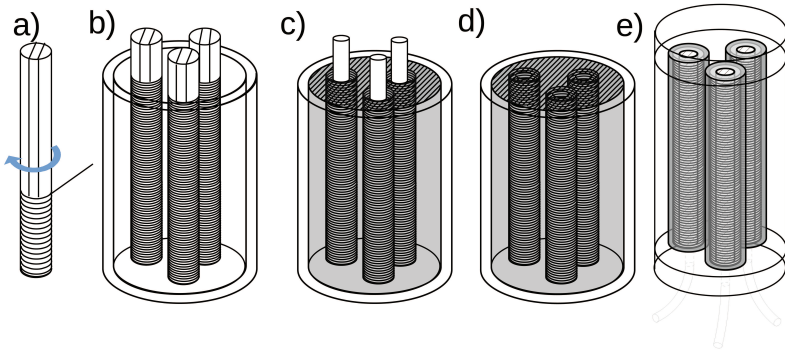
Initial manufacturing approach. (a) chambers manufacturing - winding a thread on prefabricated silicone cylinder, (b) body moulding, (c) imperfections caused by the stresses introduced during winding process.
